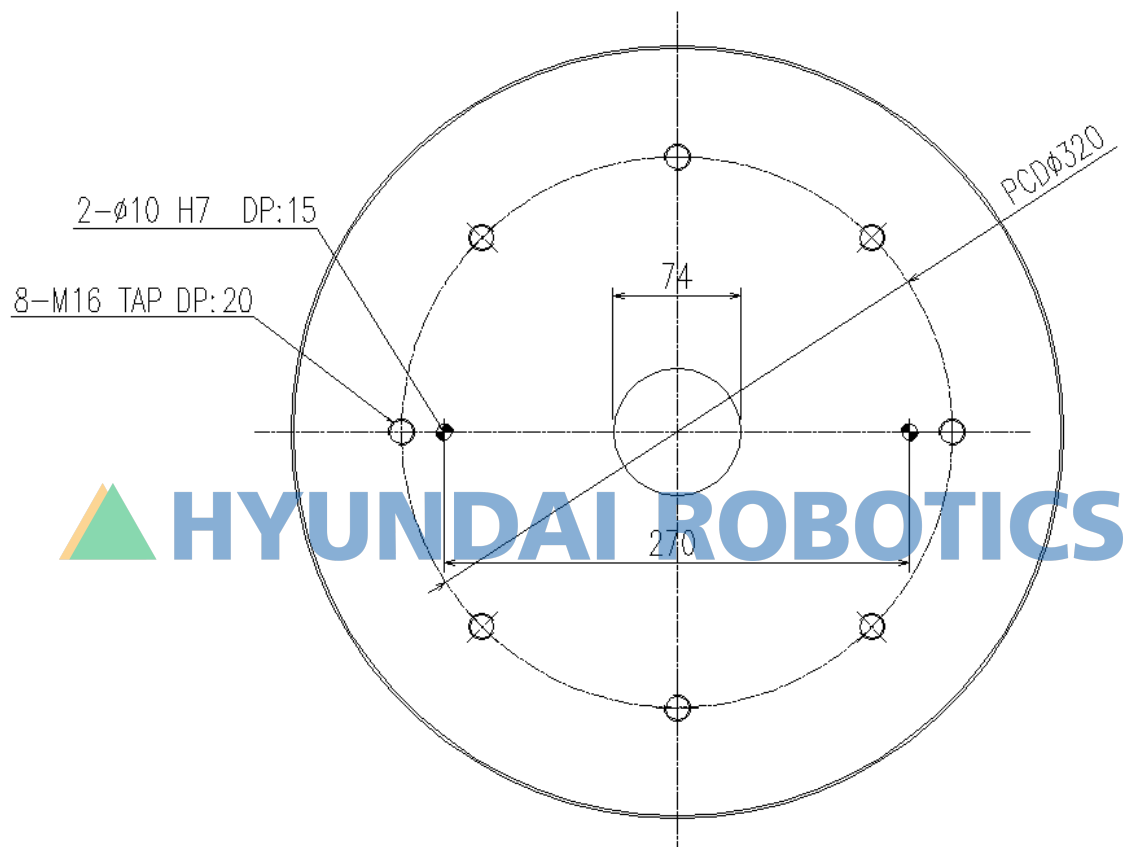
Detailed Drawing of the Mechanical Interface Attachment Surface
